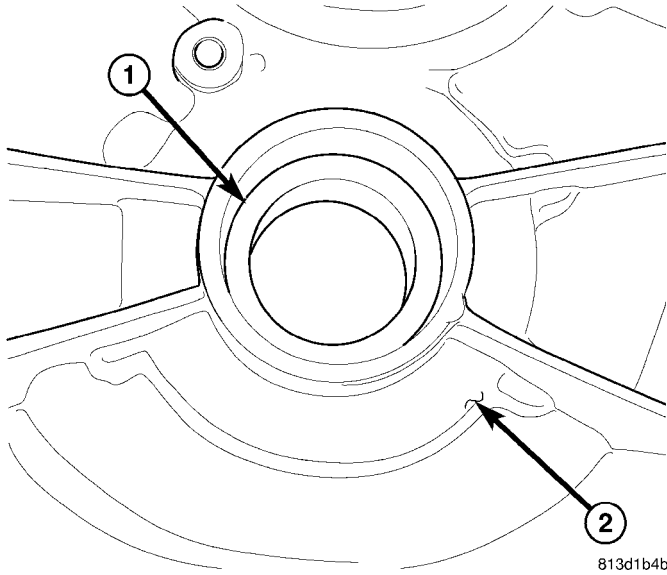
COUNTERSHAFT BEARING FRONT HOUSING
